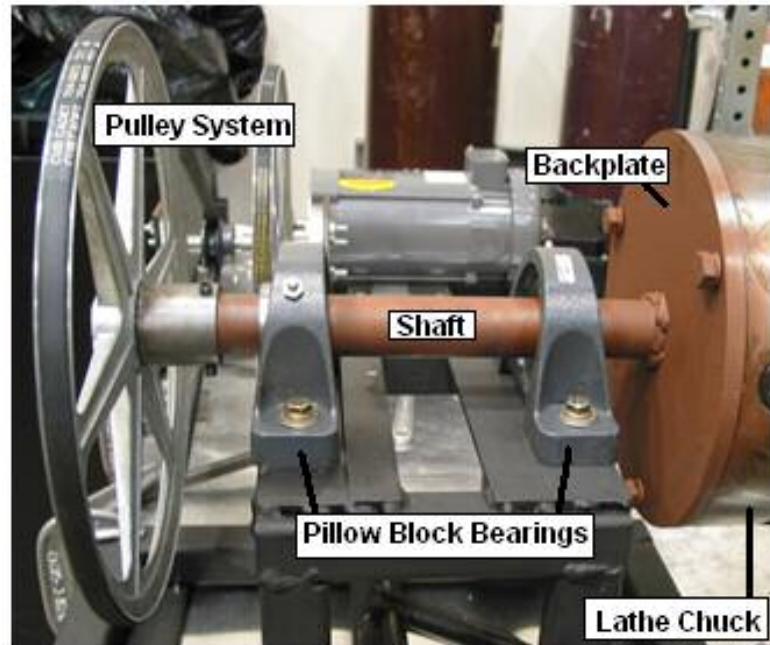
Pulley system shaft, and backplate setup connected through two 1 ½” pillow block bearings
